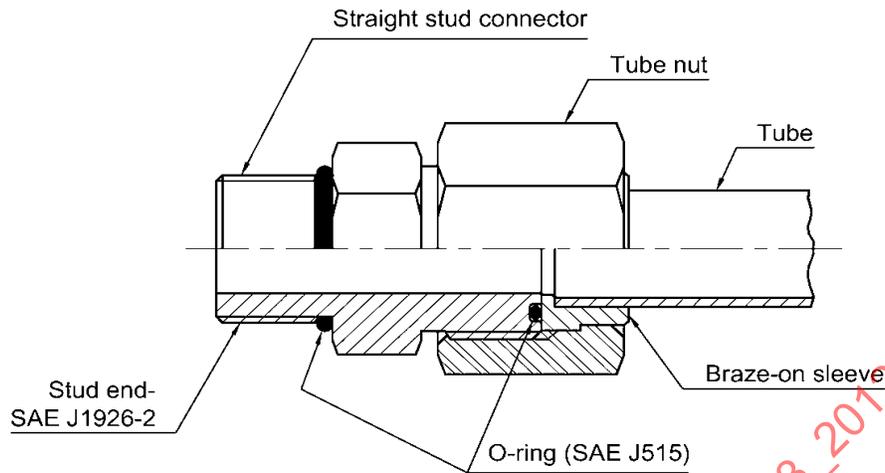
TYPICAL REPRESENTATION OF O-RING FACE SEAL (ORFS) CONNECTION
